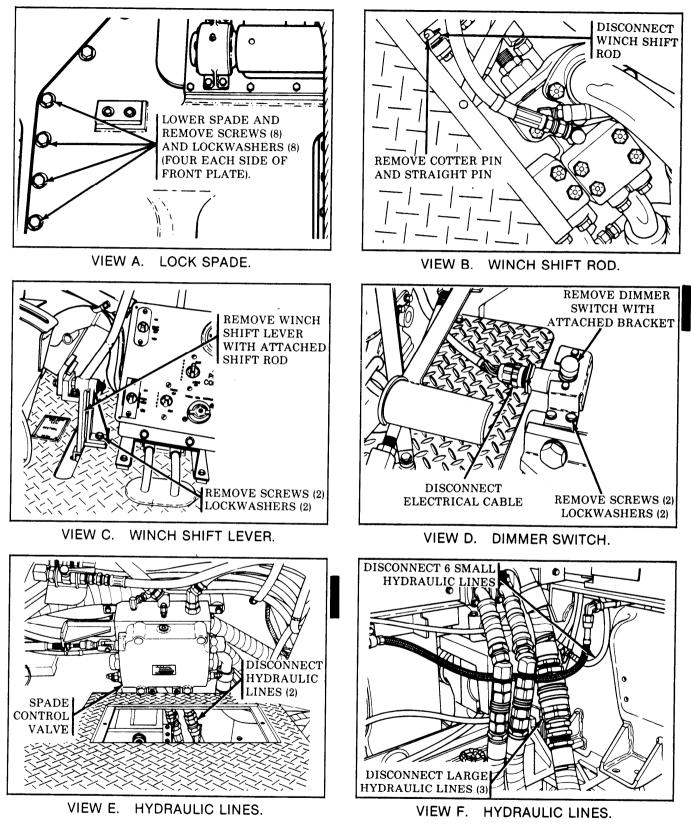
Main winch and spade assembly - removal and installation (Sheet 1 of 2).
